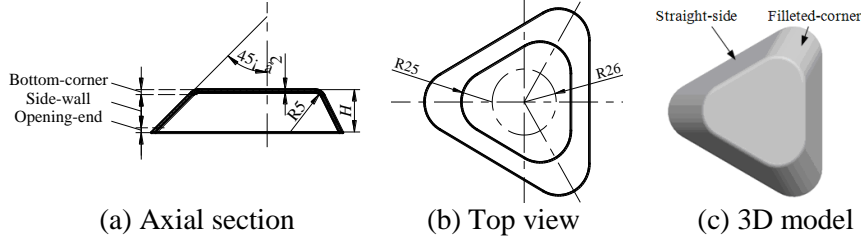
Hollow parts with three straight-edge round-corner cross-section.
